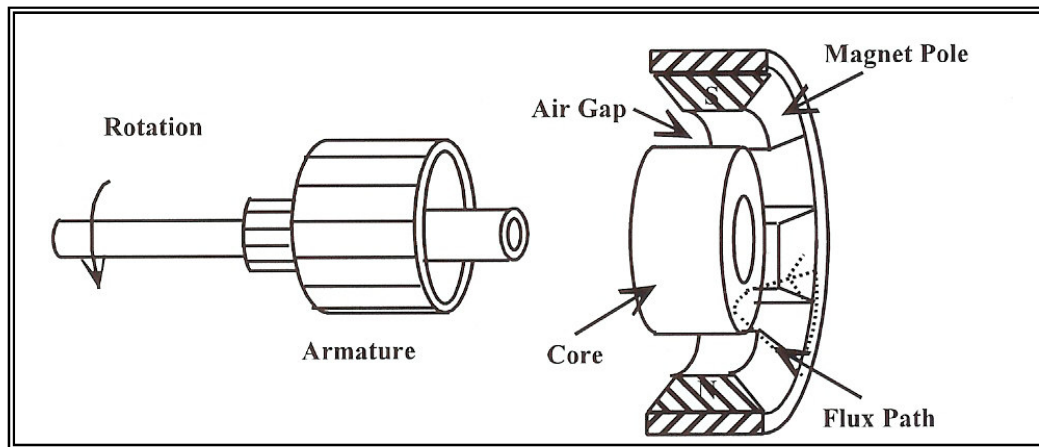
Exploded side view of a PM Moving Coil DC Motor
